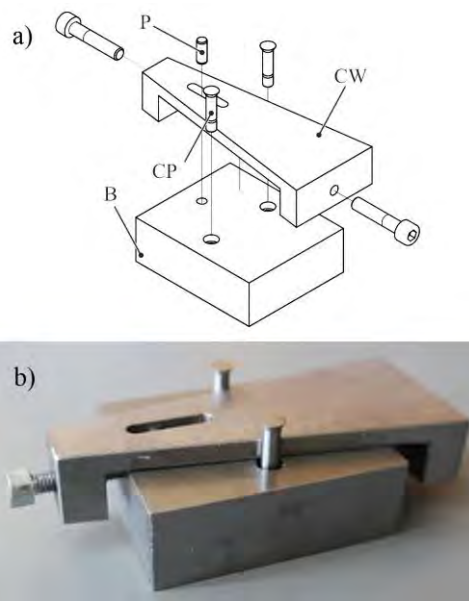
Fixture used to locate and clamp over one plane; a) 3-D model, b) photo-image.
